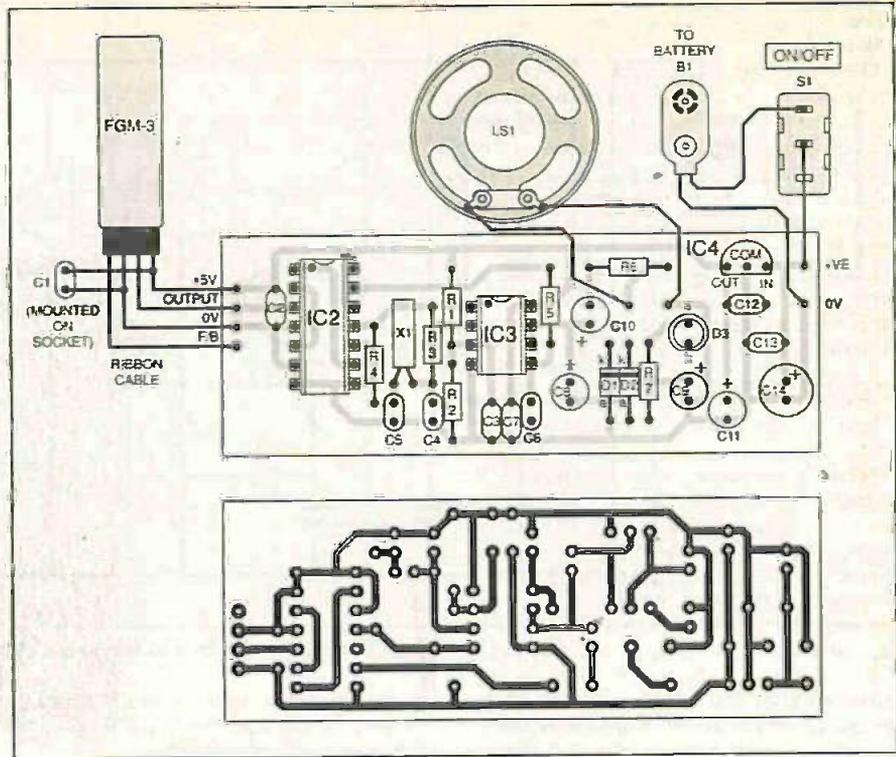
Component layout, full size copper foil master track pattern, and off-board interwiring details.
